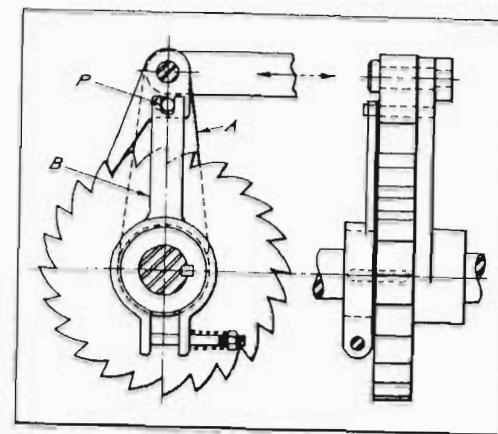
Alternate design of silent, positive ratchet mechanism with connecting-rod and pawl pivoted on same pin.
